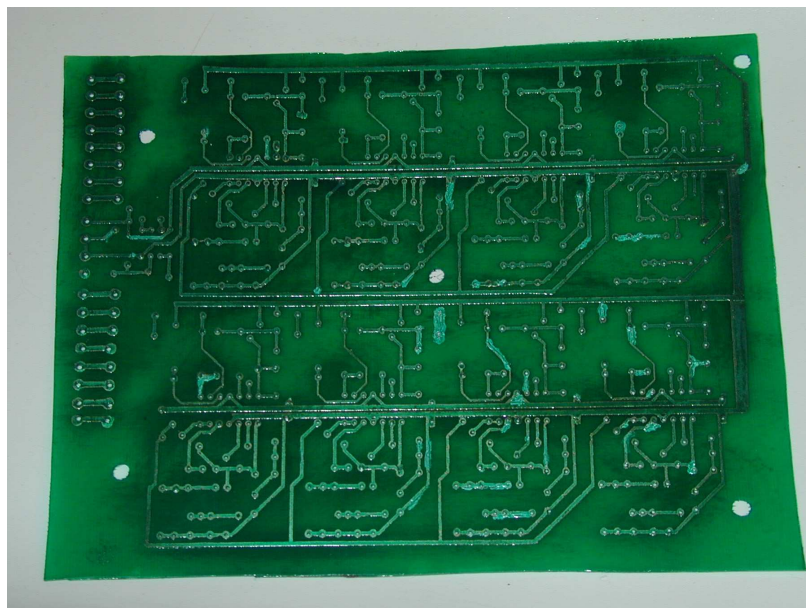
After drilling the component holes, the board is sprayed with a green enamel. This acts as an insulator and also as a solder mask. It also gives the board a professional look. At this point, one could apply another toner transfer to the board, called the silkscreen layer. This outlines the locations of the parts and acts as a placement guide.
